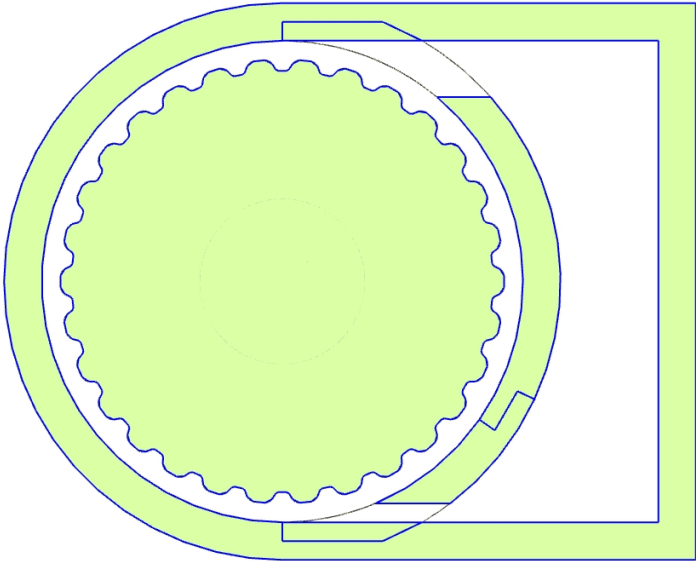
Section view of wet clutch housing with 0-degree outlet.
